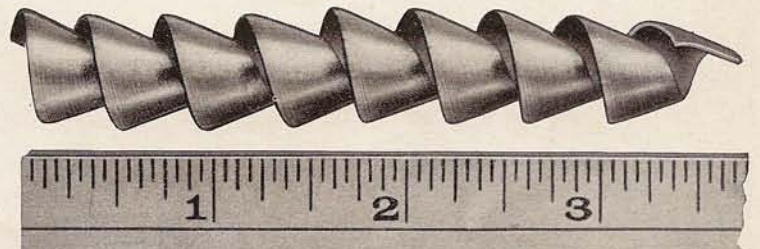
A Section of the Steel Chip (actual size) Shown in Figs. 116 and 117
